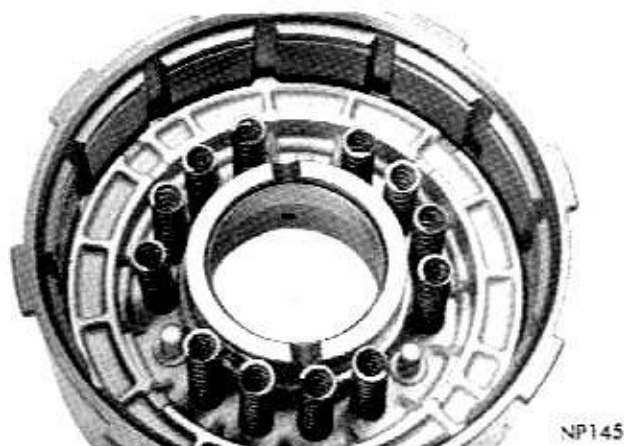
Front Clutch Piston Return Spring Location (12 Springs)
